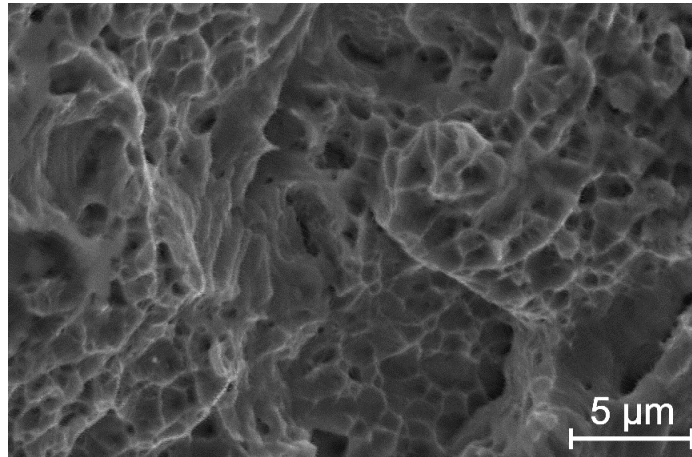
Fracture surface of the post-weld laser processed sample.
